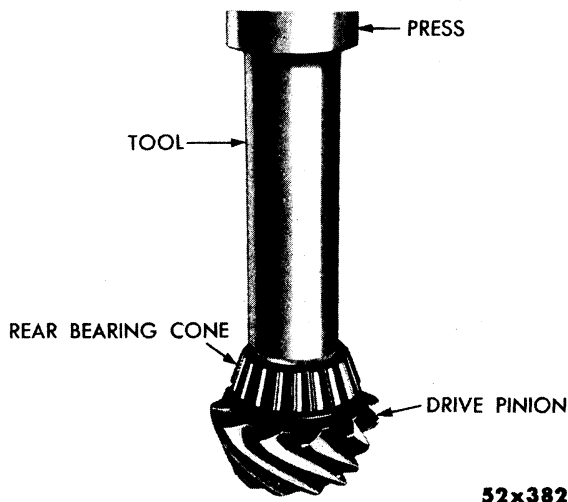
Installing Pinion Bearing Cone on Pinion Shaft
